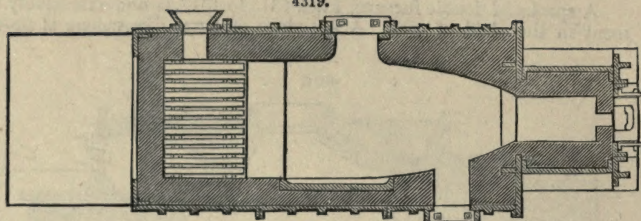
, 4319, are respectively a longitudinal section and a sectional plan of a puddling furnace for refined plate metal; Fig. 4320, section through furnace looking towards stack; Fig. 4321, back elevation of stack frame; Fig. 4322, side elevation of furnace; Figs. 4323, 4324, plan and end views of top of stack showing damper; Fig. 4325, sectional plan of stack; Fig. 4326, section of stack with damper at the bottom; Figs. 4327, 4328, view and section of working door; and Fig. 4329, view of charging door.
